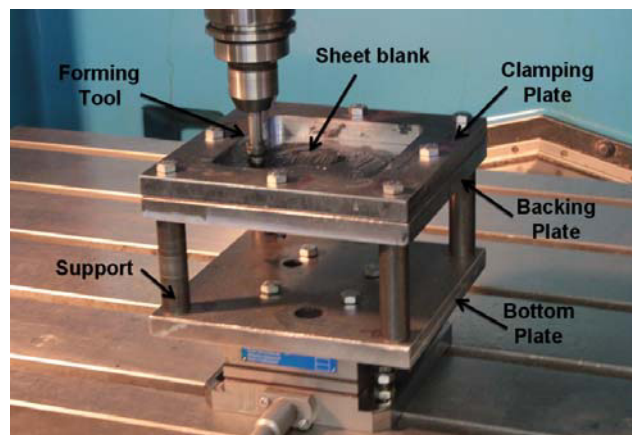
SPIF experimental setup mounted on a Kondia CNC milling machine.
